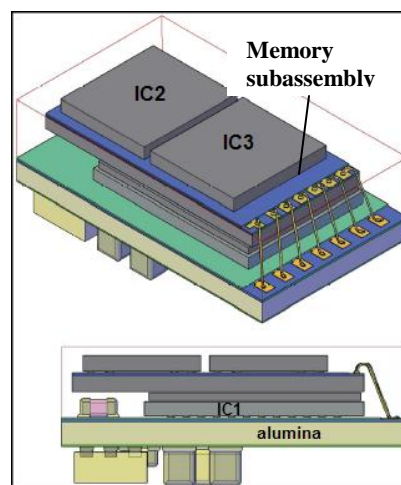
Thick film module internal view. Encapsulation and BGA bumps are not shown.
